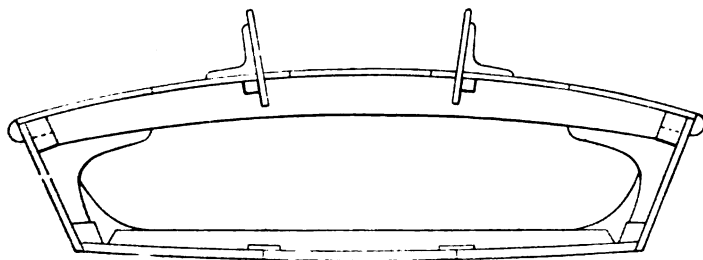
SECTION OF PUNT AT GUN-BEAM SHOWING FENDER-STRIPS TO GUNWALK AND OTHER BUILDING DETAILS. 1 in. = 1 ft. (No. II. p. 494.)
